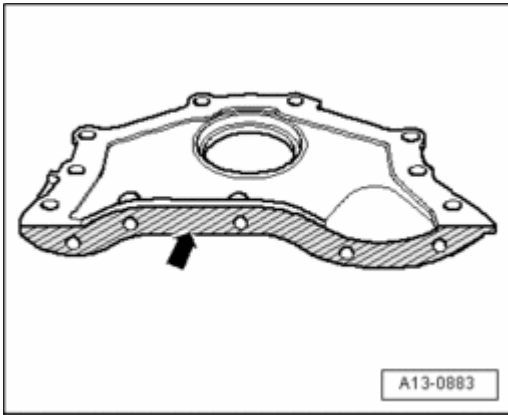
Lightly Coating Lower Sealing Surface Of Sealing Flange With Sealant
